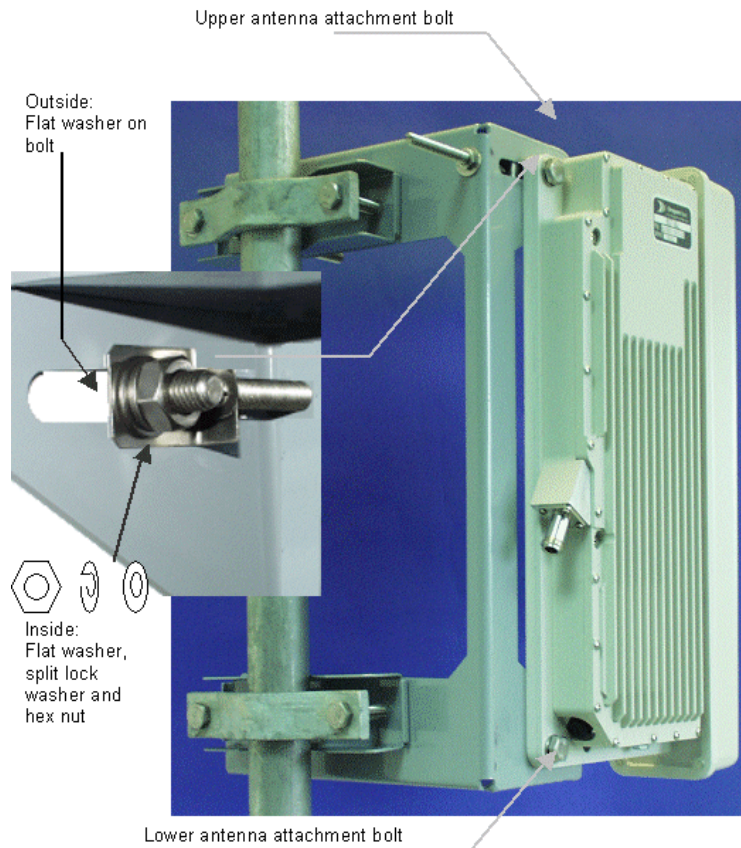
Attaching the BS 28 GHz ODU to the Assembly
